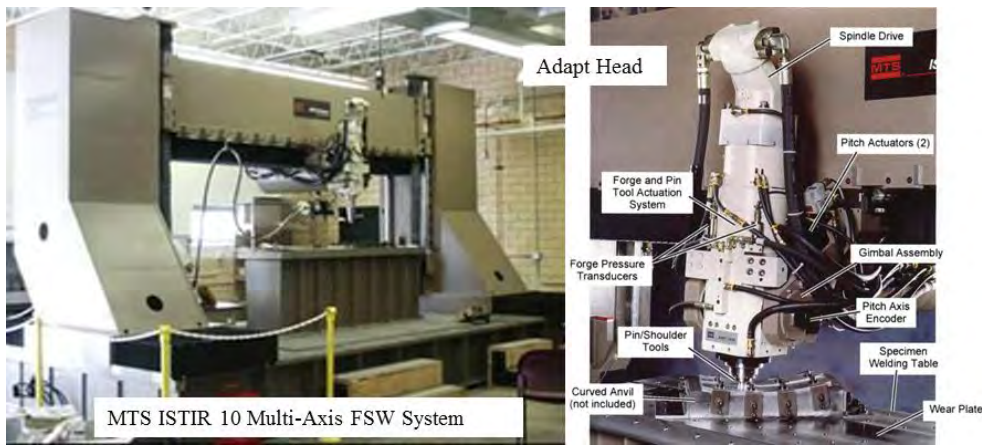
SDSM&T Friction Stir Welding Tool
